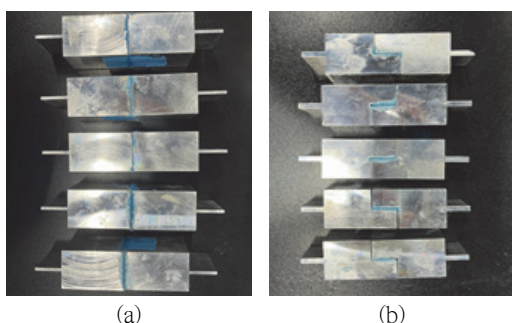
(a) Perpendicular tensile & (b) Shear specimen
